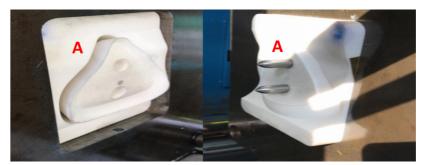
3D printed tooling inserts (A) inside a conventionally machined tooling bolster (courtesy Advanced Manufacturing Unit: PDTS)
